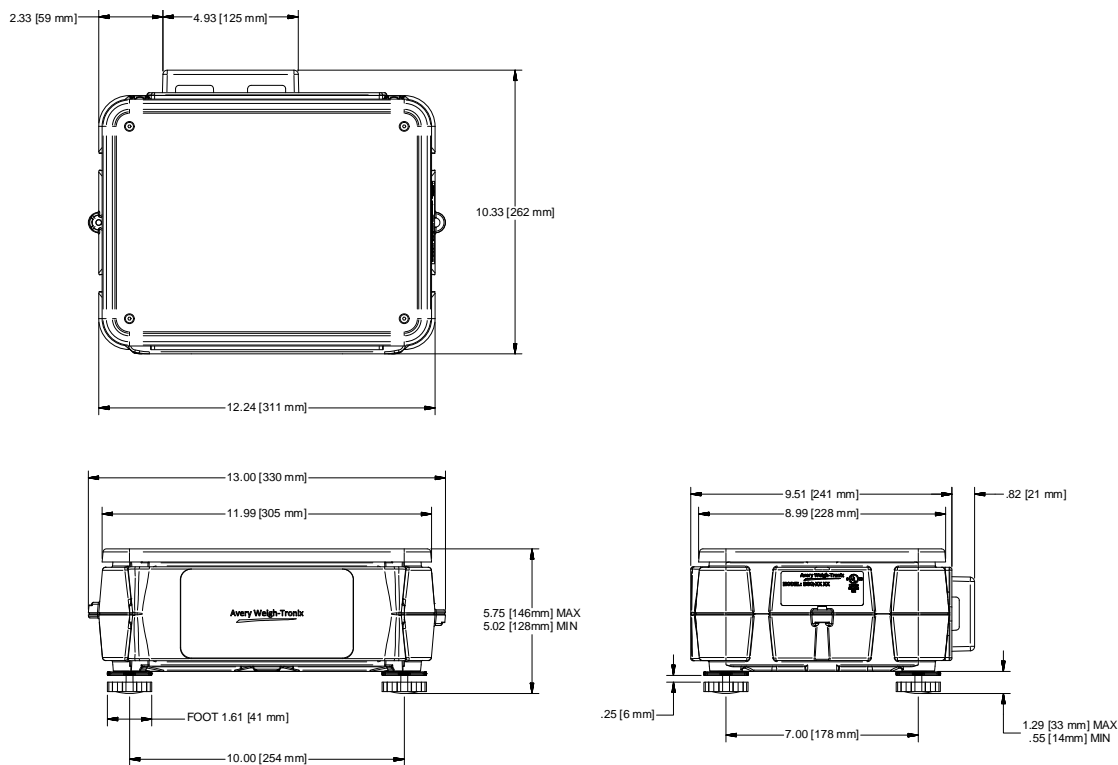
Model 0912 BSQ dimensions with PSU but no indicator
